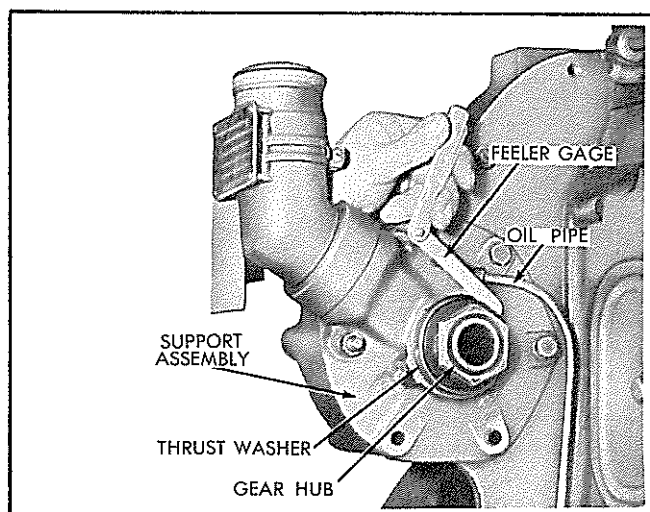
Checking End Clearance of Blower Drive Gear Assembly
